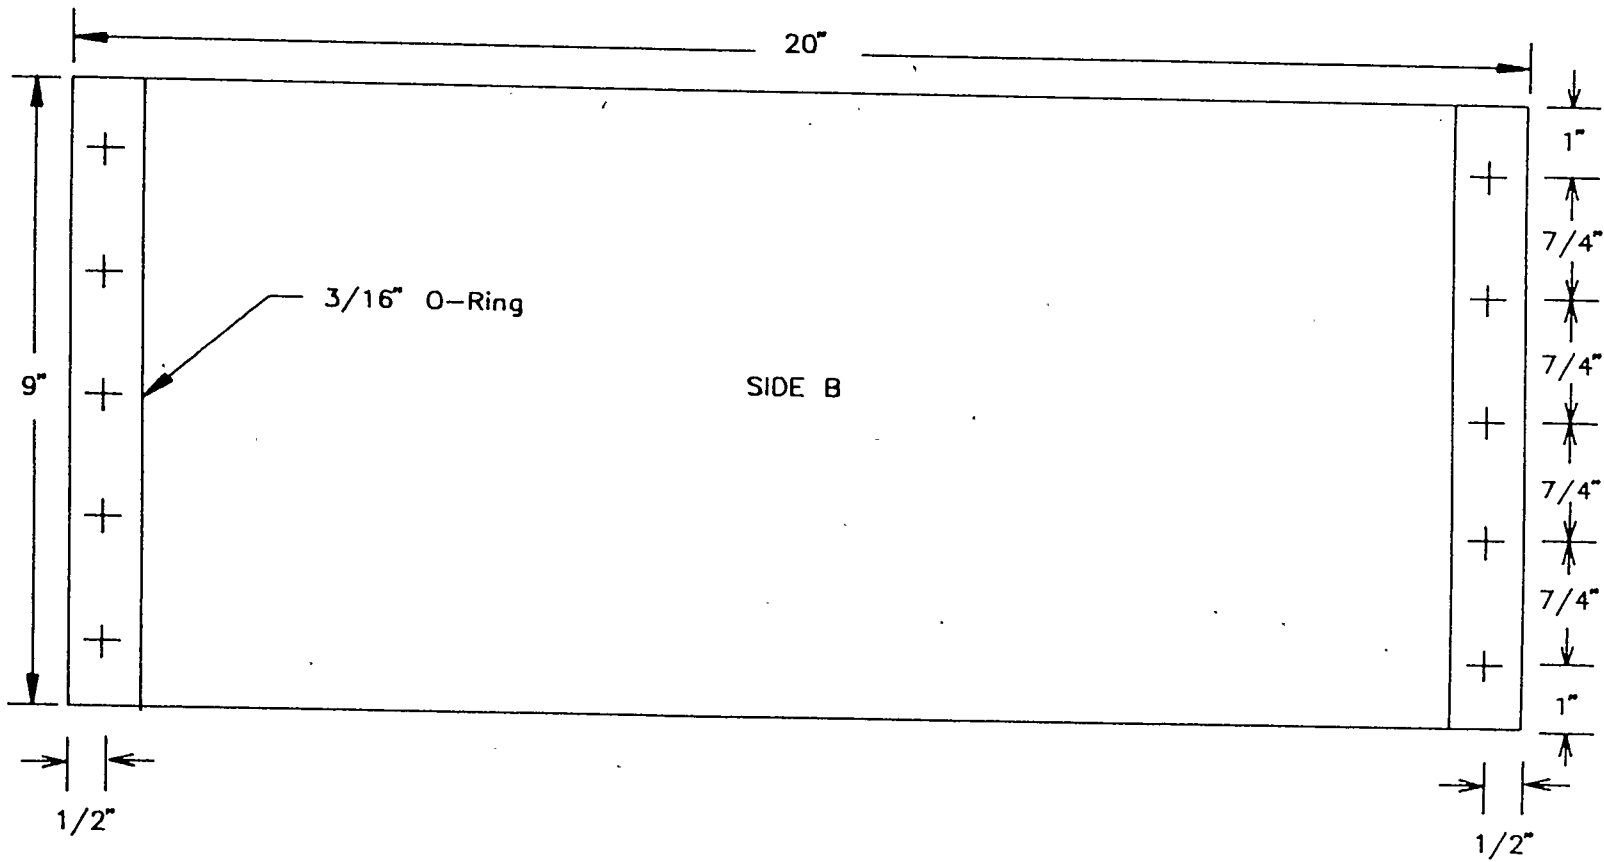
Bolts and O-ring location and external dimensions of side B
